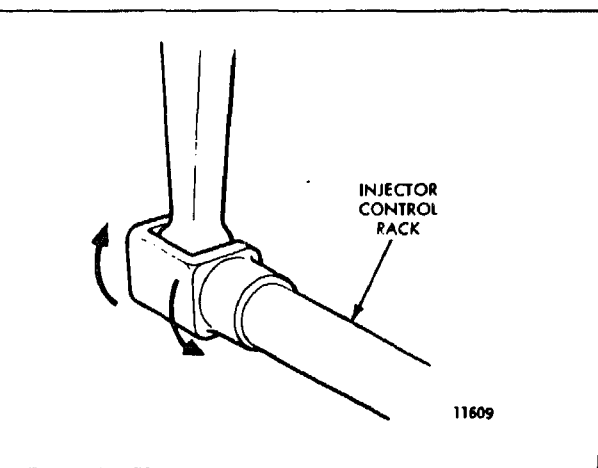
Checking Rotating Movement of Injector Control Rack
